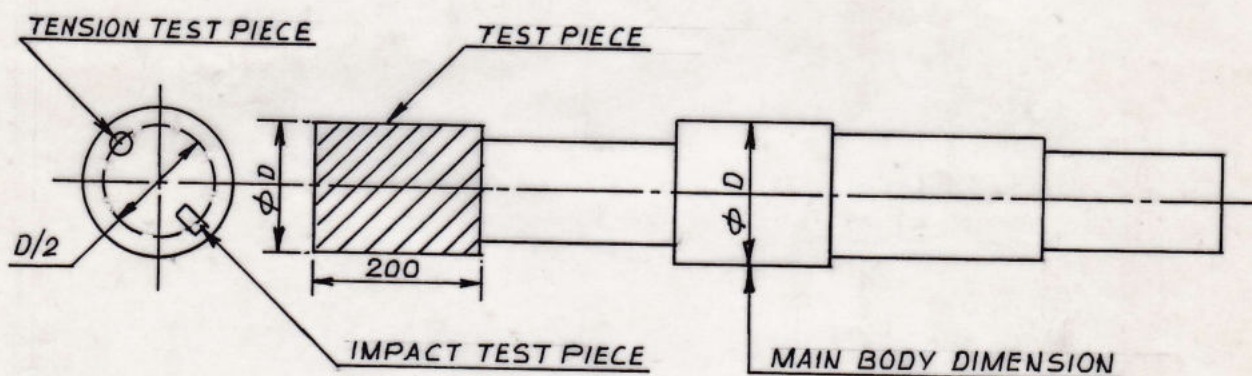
Size of the Test Piece Attached to Main Body and Test Piece collecting Position.
